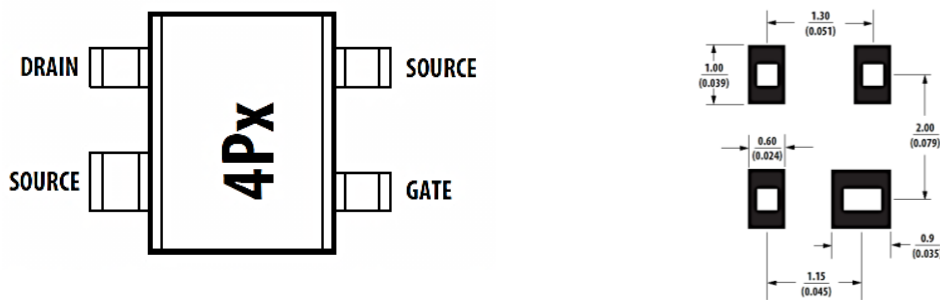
Pin connections and recommended PCB pad Layout for the transistor.
